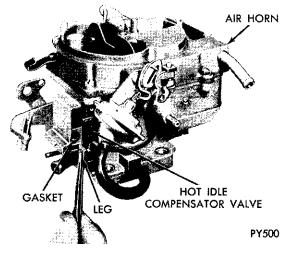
Removing or Installing Hot Idle Compensator Valve
